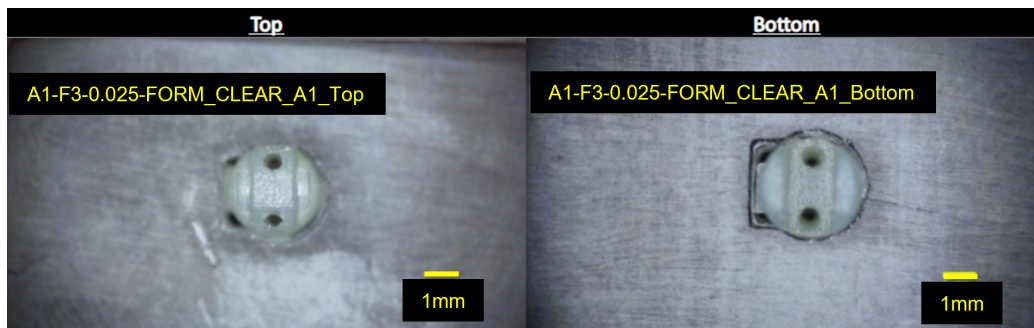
Sample Manufactured Parts After Processing in Anycubic Wash Station
